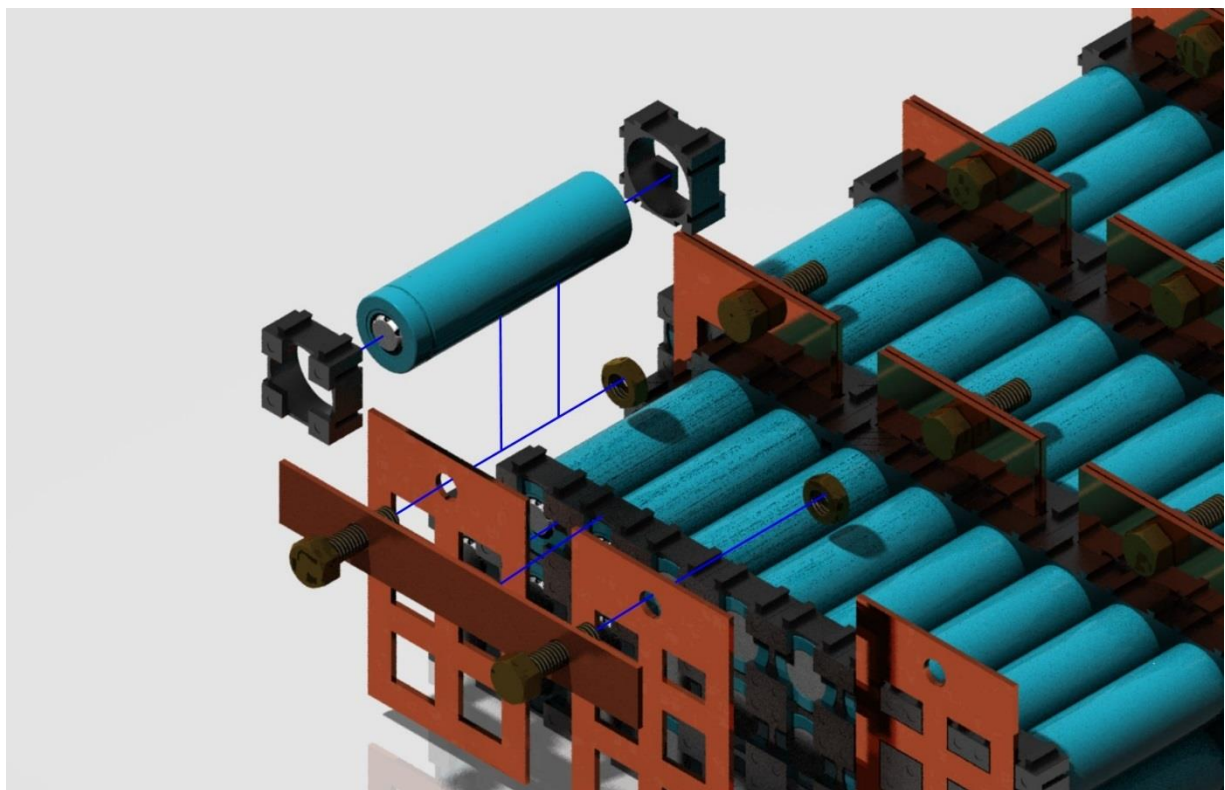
Exploded view of FUSEV's BARR at 50.8V and 30Ah Nominal.
